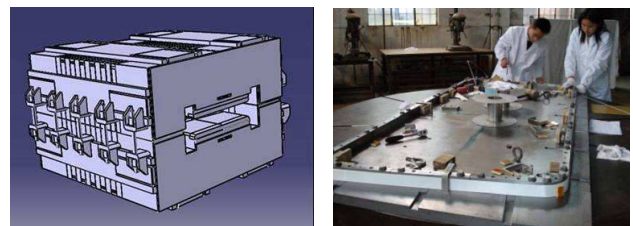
3D yoke design of the superferric dipole magnet (left) and winding of a test coil (right).
